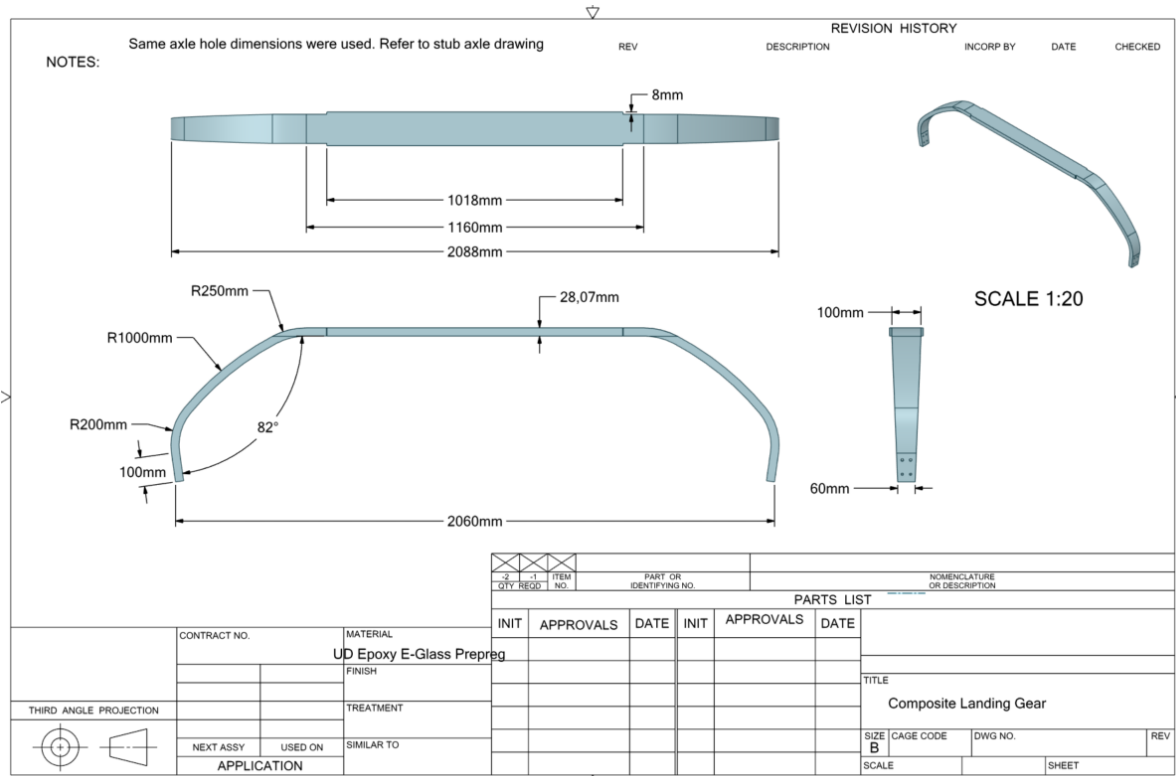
UD Epoxy E-Glass Prepreg Landing Gear Dimensions Drawing
